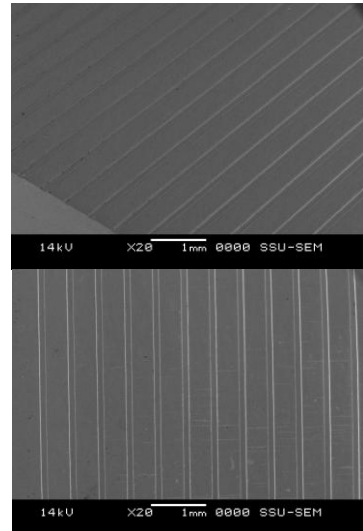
Micro grooves machined by PCBN micro tool (NAK80, width 100 μ m, depth 50 μ m)
